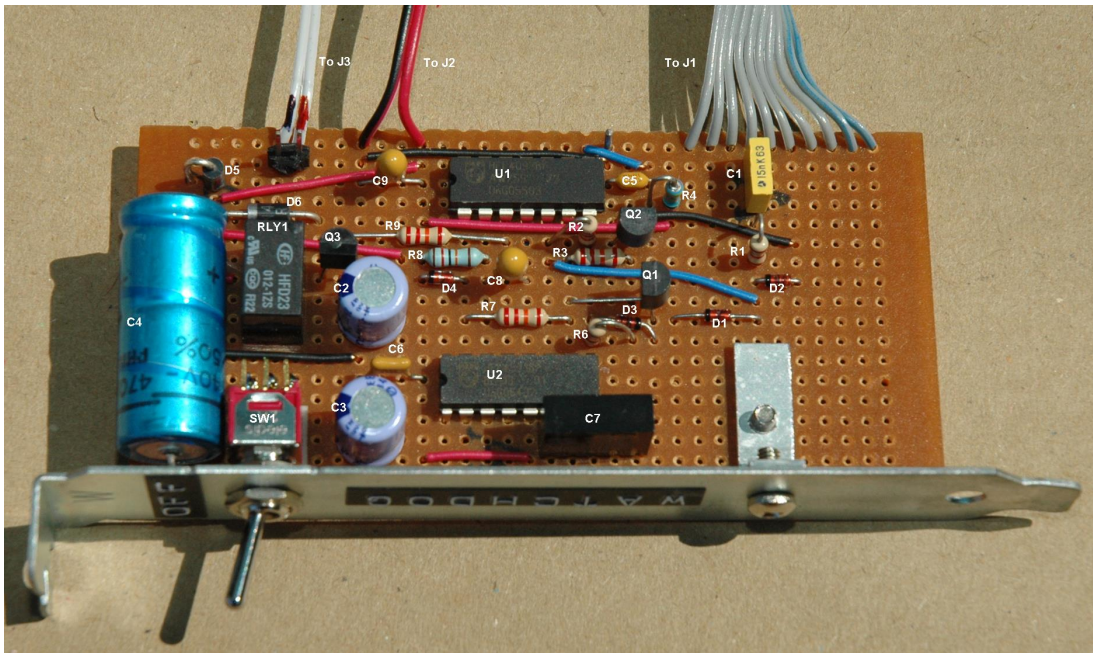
Gingen Watchdog assembly showing the components layout and mounting bracket for assembly into a standard PC expansion slot.
